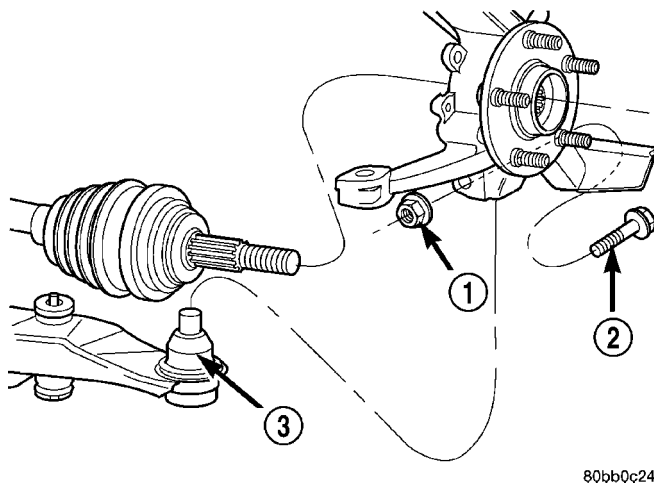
Steering Knuckle at Lower Control Arm Ball Joint
